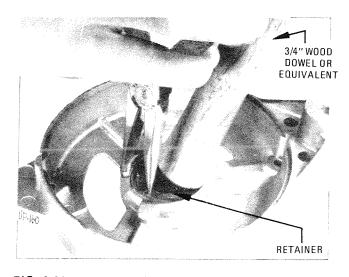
INSTALLING FRONT BEARING RETAINER
